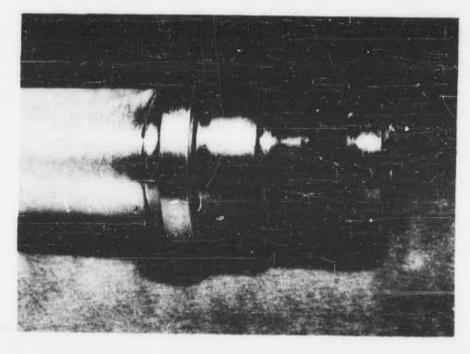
Sleeve Bearing Shaft - Type 316 Stainless Steel
